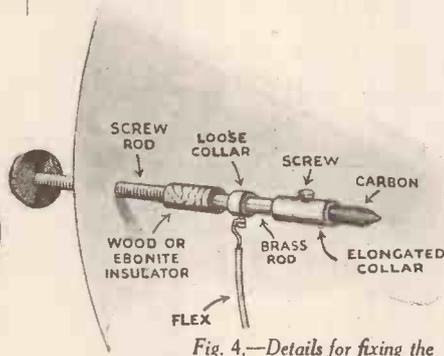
Details for fixing the left-hand carbon to the lamp.
